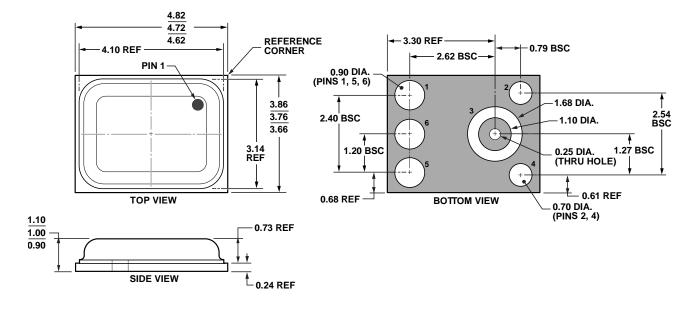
3-Terminal Chip Array Small Outline No-Lead Cavity [LGA\_CAV] 4.72 × 3.76 × 1.00 mm Body (CE-3-2) Dimensions shown in millimeters
